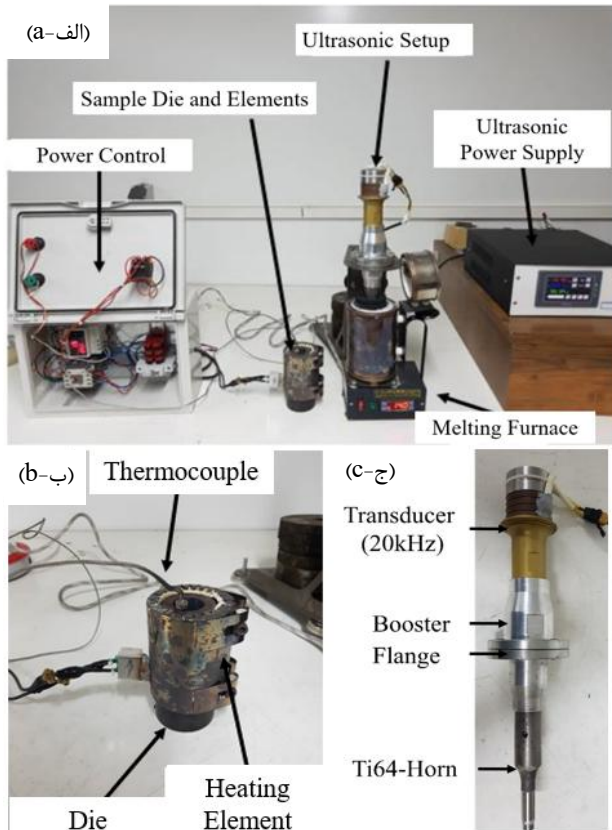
a) Ultrasonic setup, power supply, casting mold and element, melting furnace, mold temperature control panel, b) Molding Die, and c) Ultrasonic system: transducer, booster, and horn.
